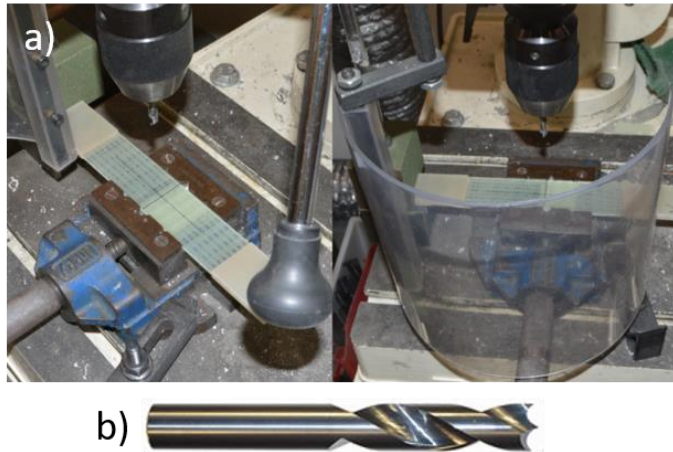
Images showing; a) the setup used for drilling holes into specimens; b) Sickle-shaped carbide drill bit for hole drilling.
